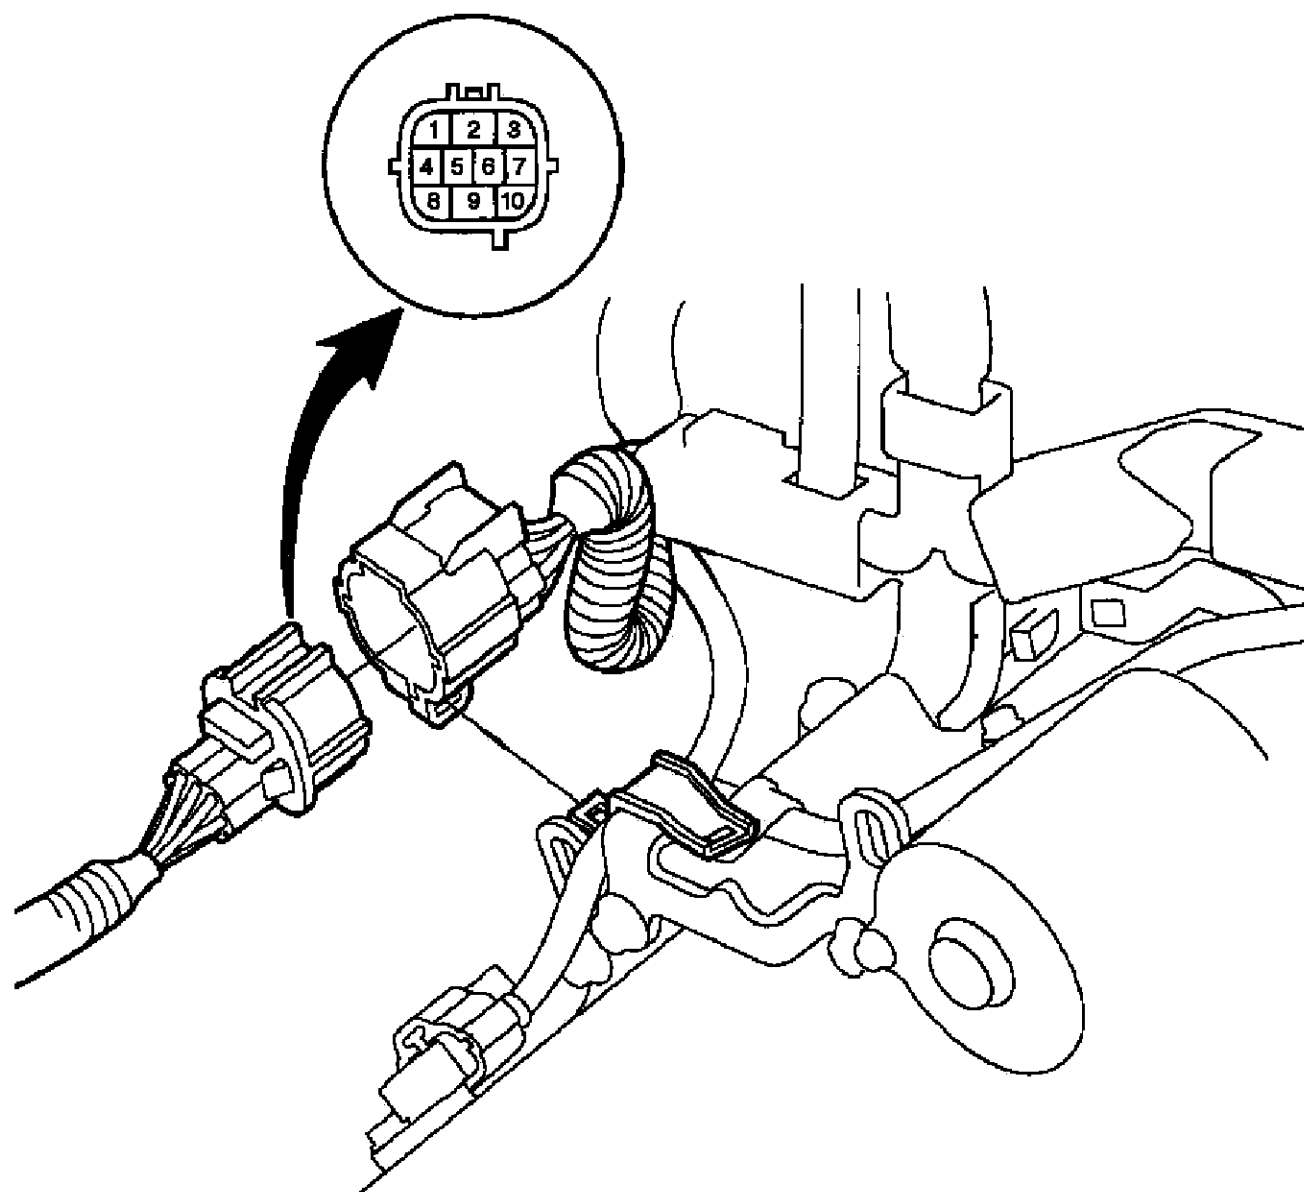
Testing Instrument Panel Gauge Assembly, Harness Connectors & A/T Gear Position Indicator
